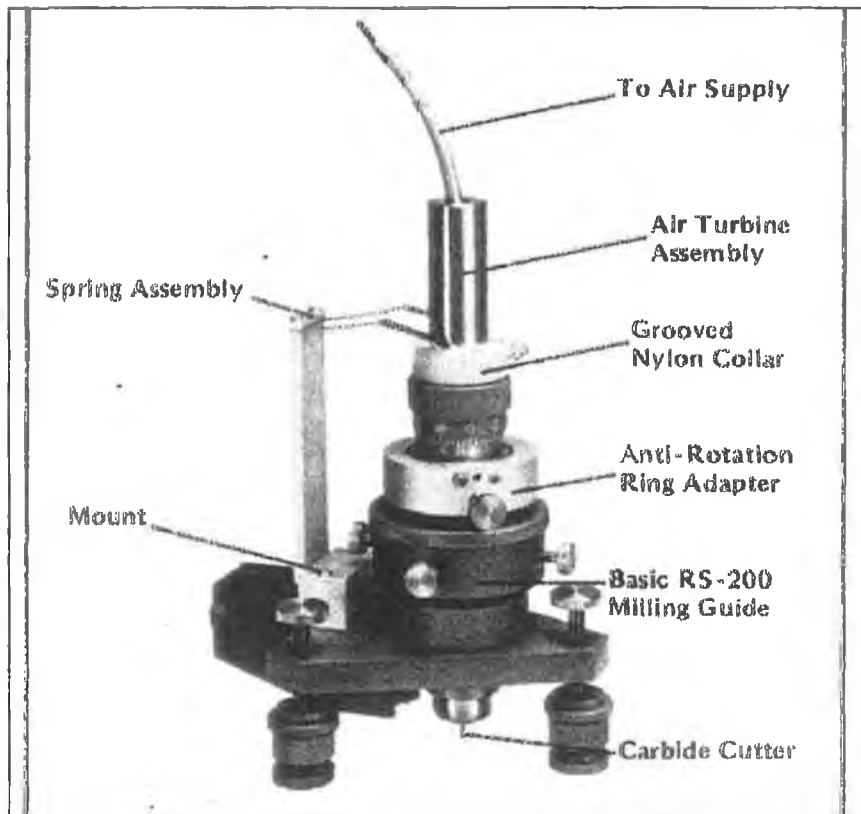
Hi-Speed Accuracy components assembled on the milling guide base
